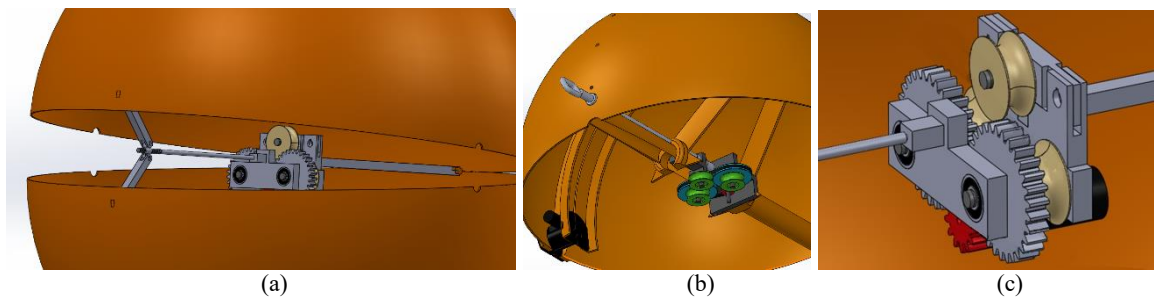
a) View of the components into the ARWM; b) the axis of drive mechanism; and c) zoom of drive mechanism.
